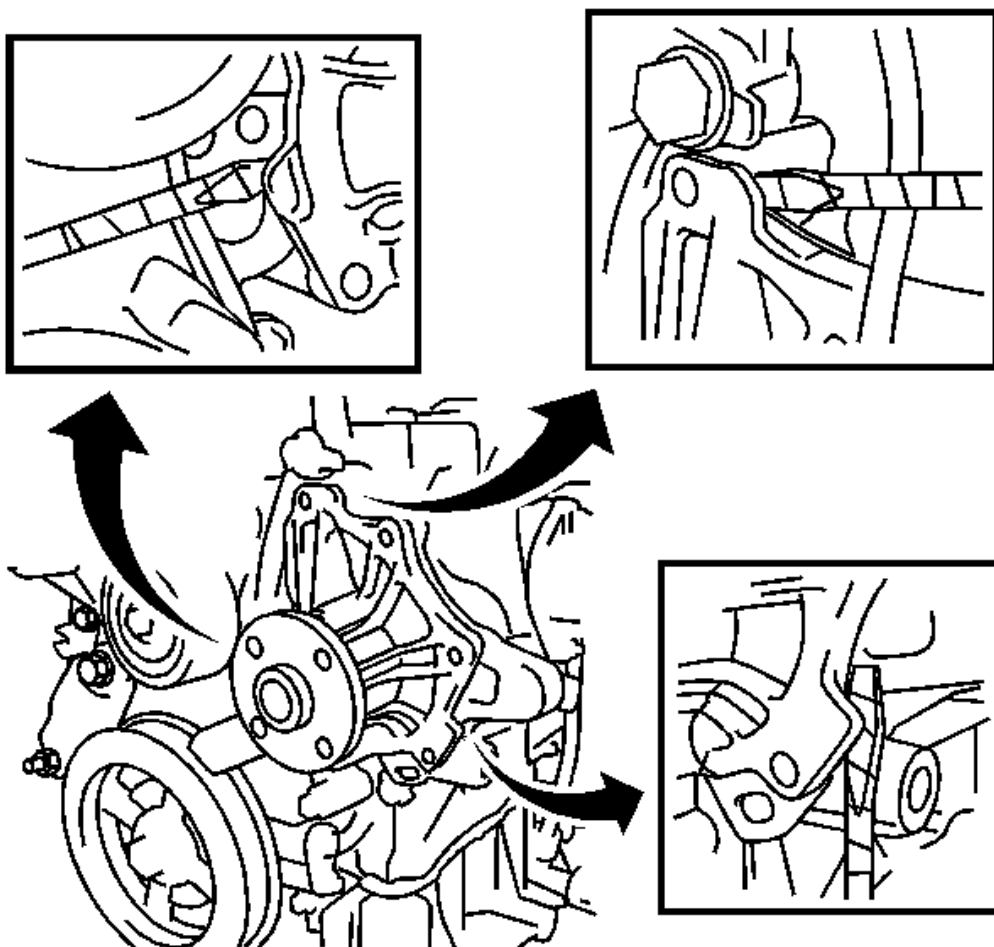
Exploded View Of Water Pump & Cylinder Block Pry Locations
